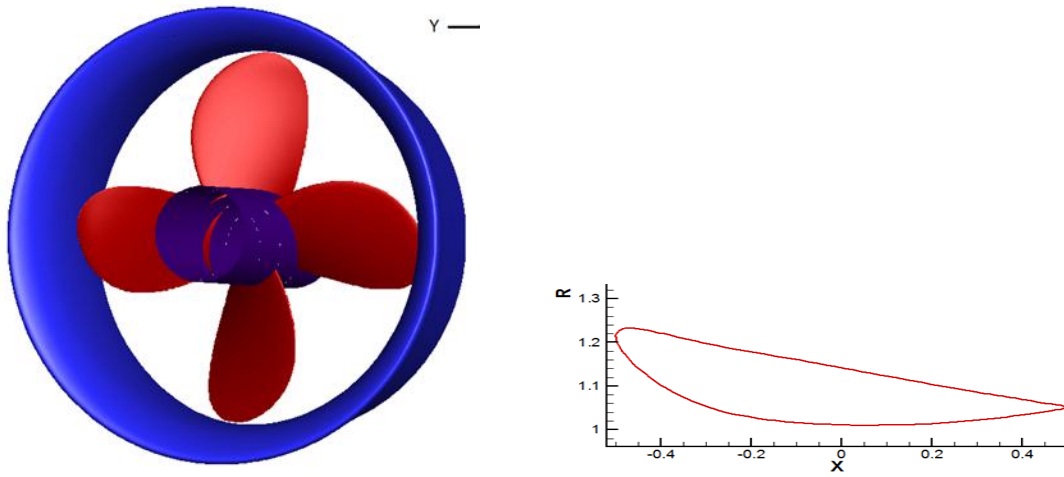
The three dimensional geometry of the round tip ducted propeller and the two dimensional section of the sharp trailing edge duct
